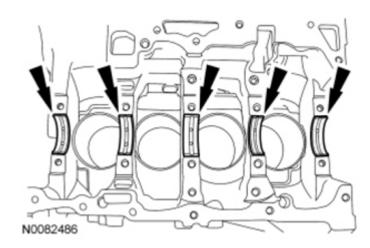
Locating Main Bearings Courtesy of FORD MOTOR CO.
